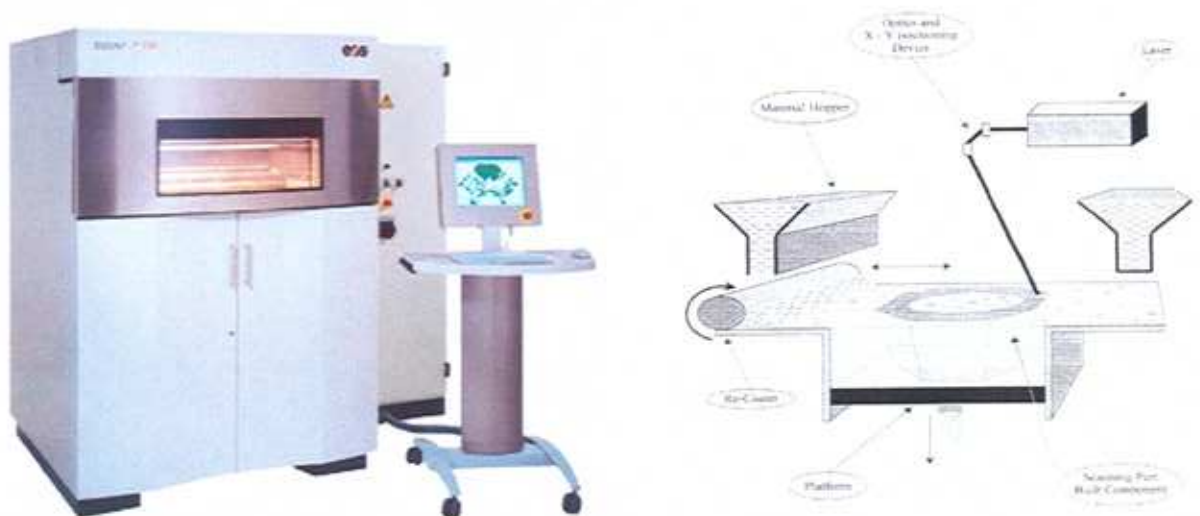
Selective laser sintering machine and schematic of the Process
